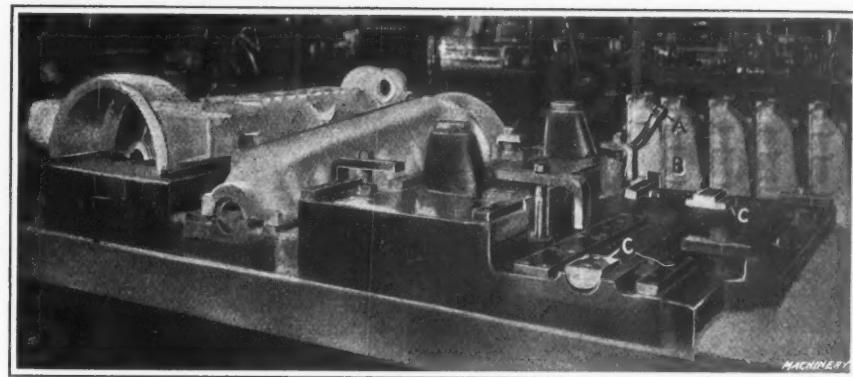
Milling Machine and Fixtures used for taking Finishing Cut over End of Gear-case and Top of Crank-case
